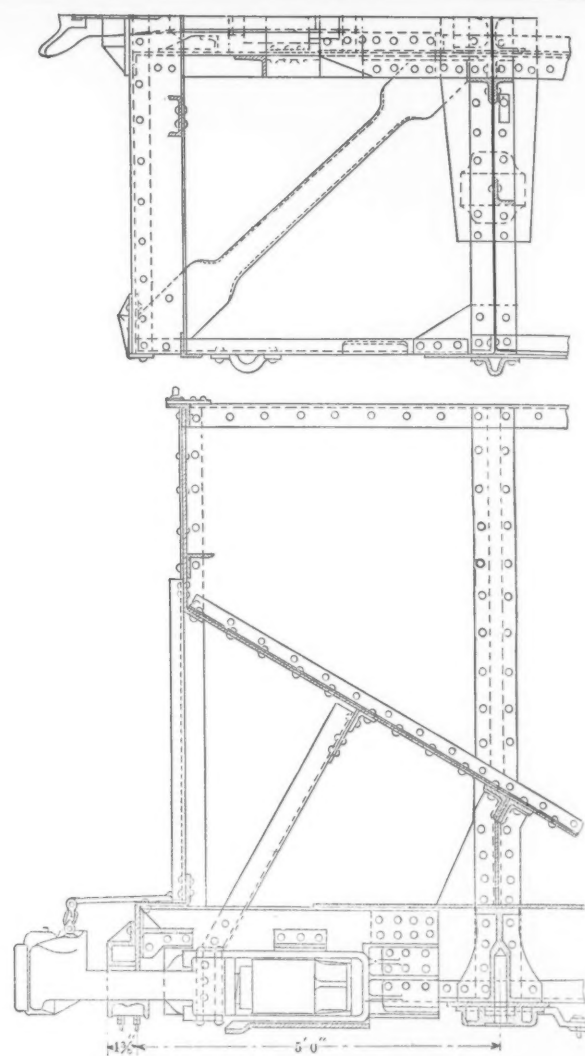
BODY BOLSTER, DRAFT SILL AND END CONSTRUCTION OF THE LAST LOT OF STEEL HOPPERS (N-10 AND N-10A).
